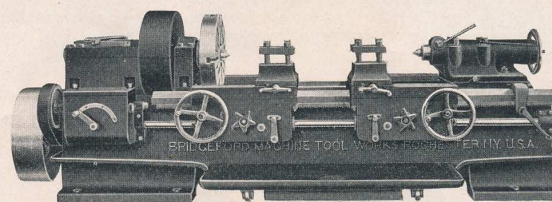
BETTS-BRIDGEFORD HEAVY DUTY SHELL TURNING LATHE, TYPE A9300
